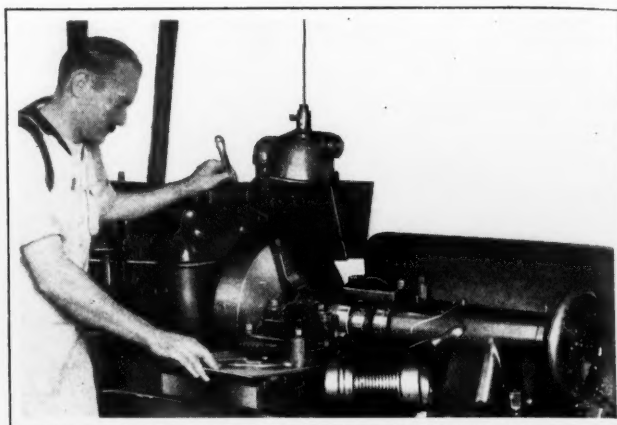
Forming the Cooling Fins of Cylinder Barrels in Specially Equipped Lathe
